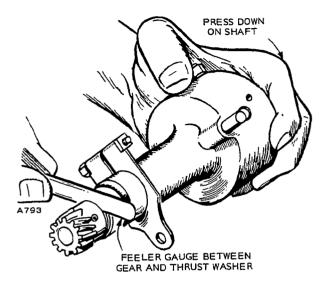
DISTRIBUTOR SHAFT END PLAY
